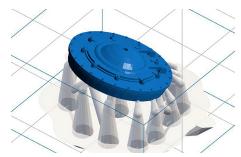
Here the finished part is shown as imported into the 3D printing software known as Pre-Form. This package drives Formlabs Form 1+ printer which is a liquid resin 3D printer. The white supports seen above are necessary to support the part during the printing process.
